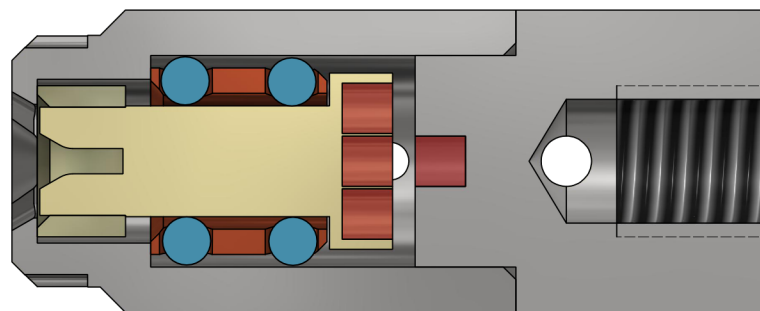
Section sketch of the holder. The grey parts move with the transfer rod, the coloured parts move with the sample plate (with exception of the red magnets in the outer shell). Contact between the outer shell and the inner part is provided by ball bearing made of stainless steel balls and copper cage.
